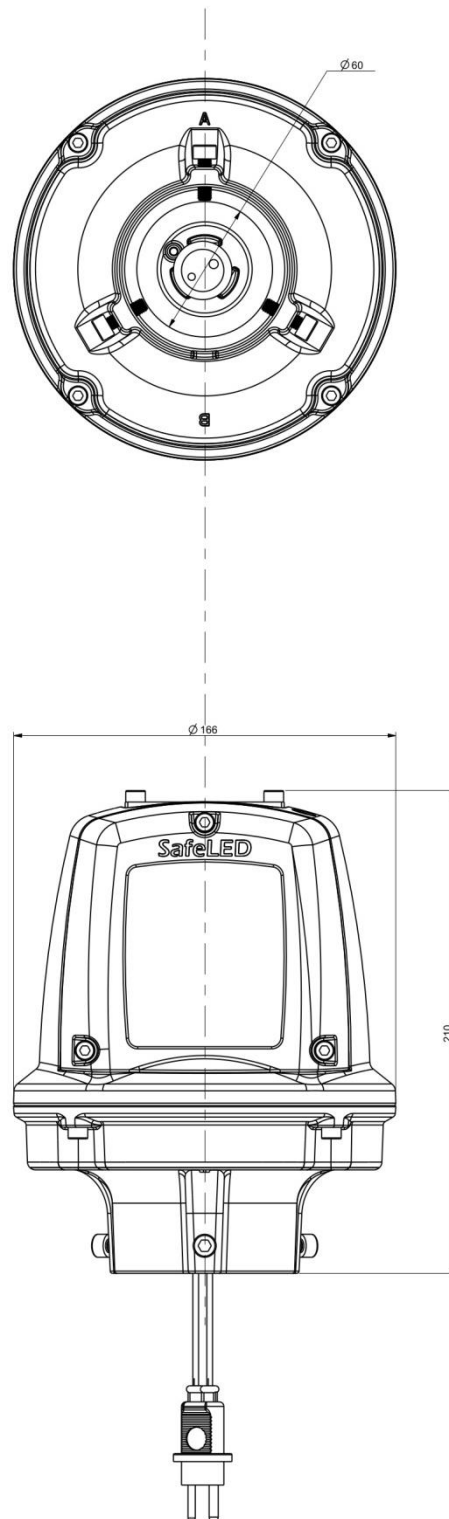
LIGHT FIXTURE DIMENSIONS
